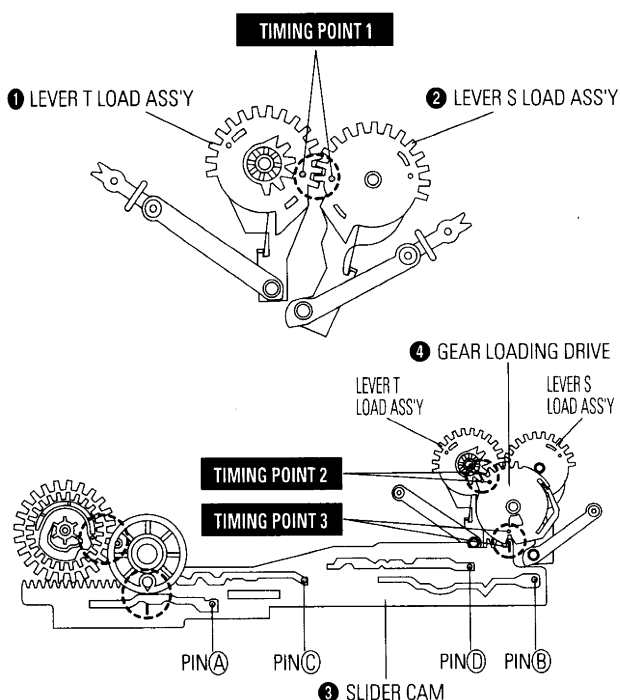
Assembly of Gear Loading Drive, Slider Cam, Lever T, S Load Ass'y
